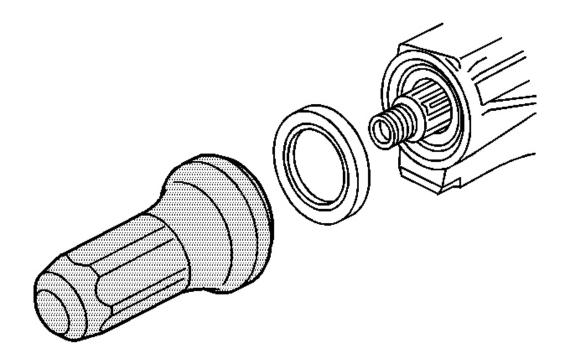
Installing Pinion Oil Seal Courtesy of GENERAL MOTORS CORP.
